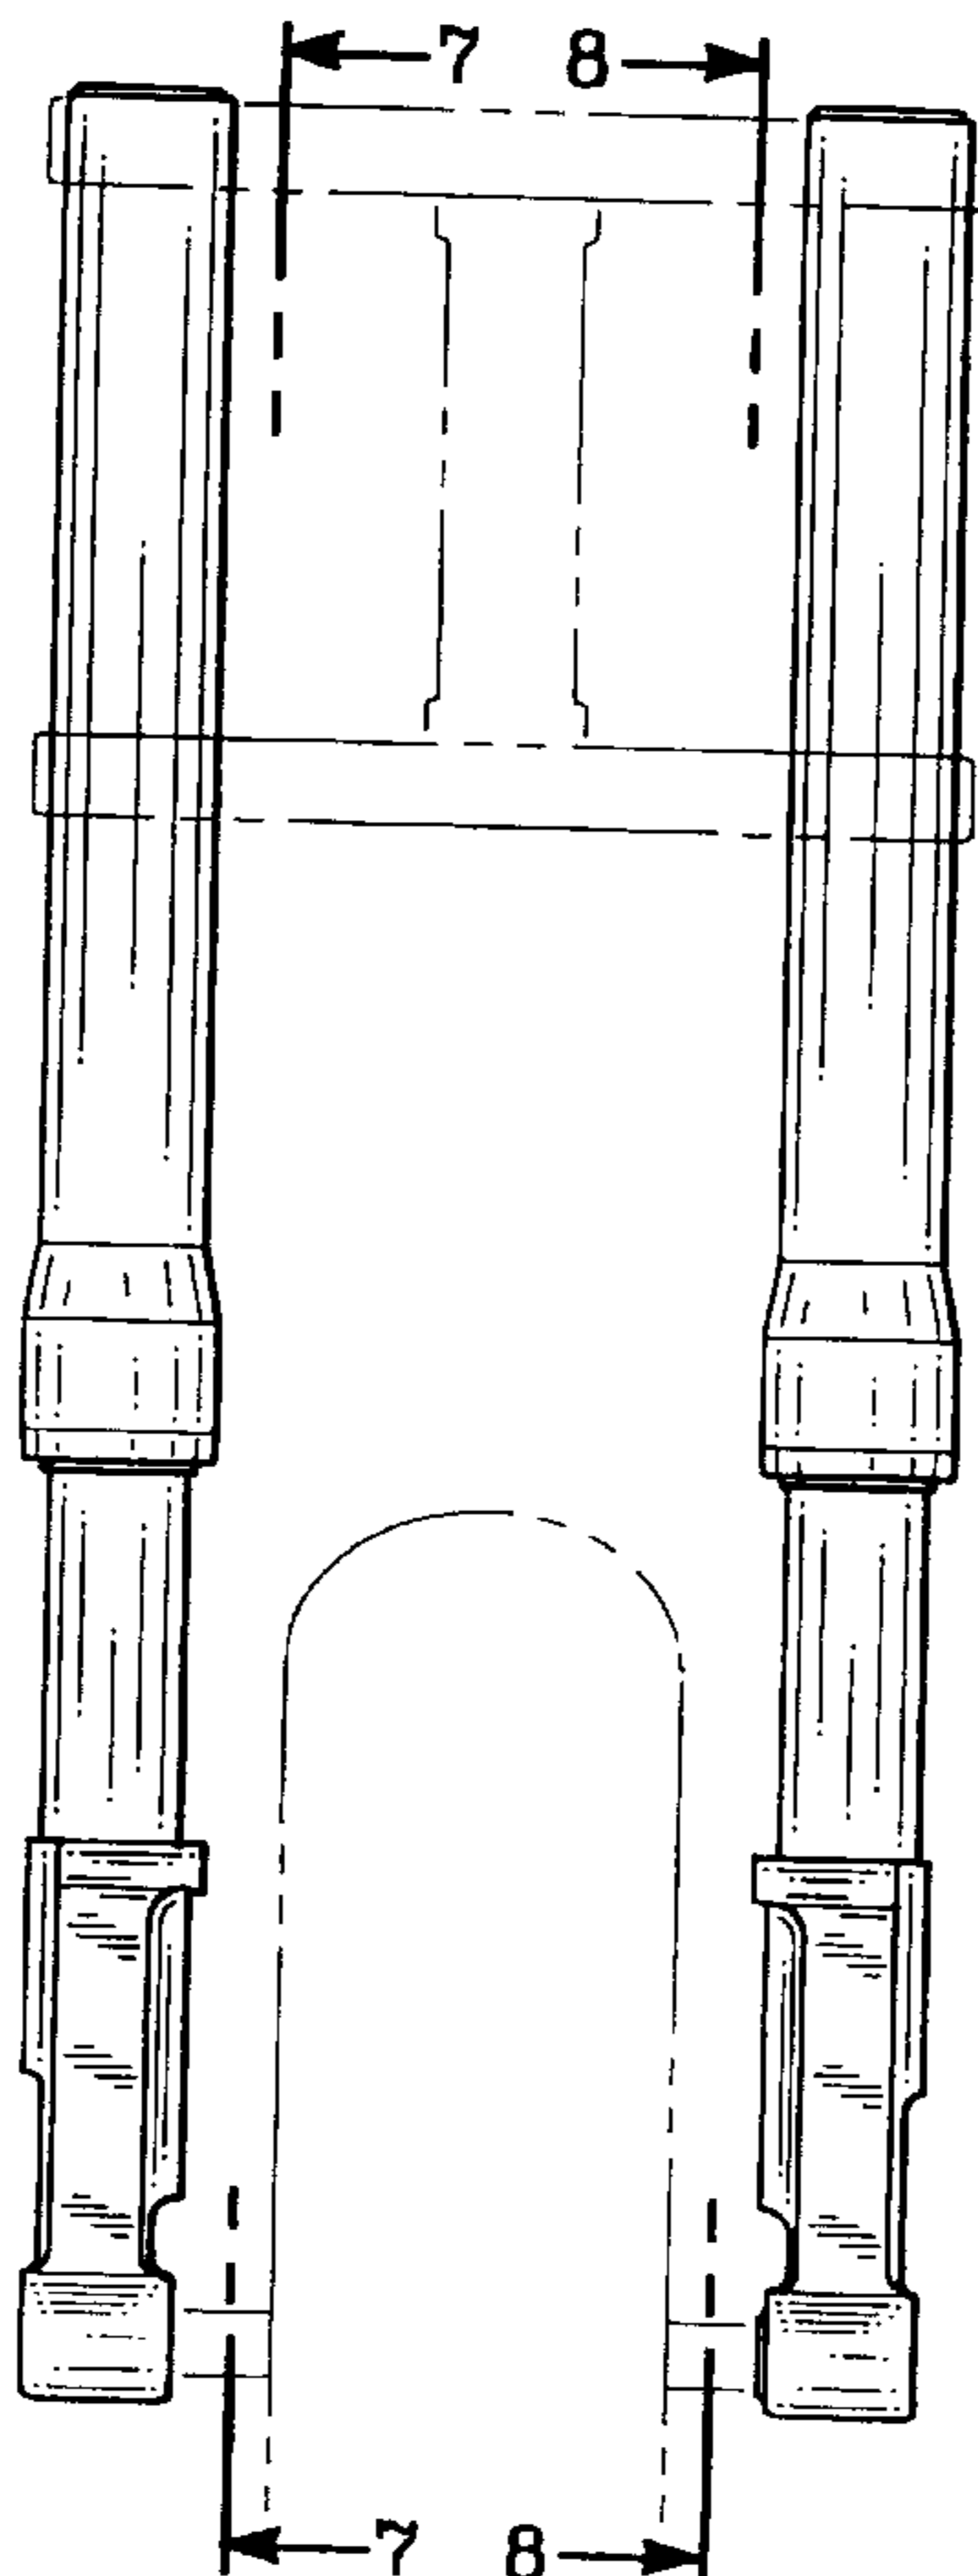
is a bottom plan view of the front suspension forks for a motorcycle.
